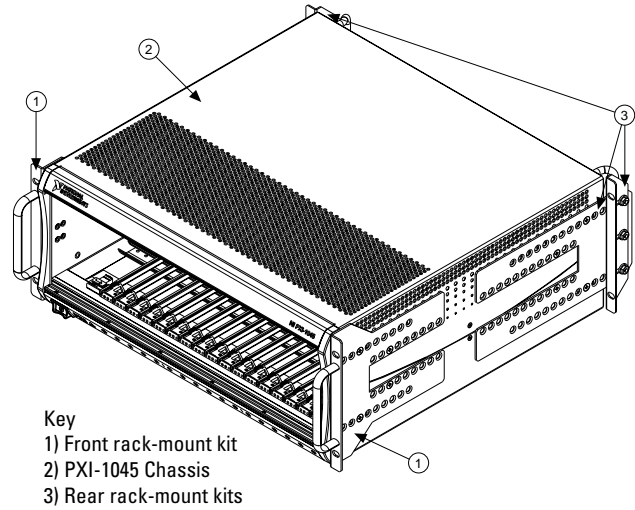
PXI-1045 Chassis with Optional Front and Rear Rack Mount Kits
